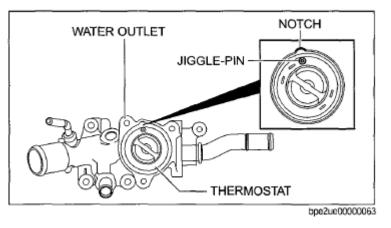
Identifying Alignment Position Of Thermostat Jiggle Pin With Water Outlet Notch
